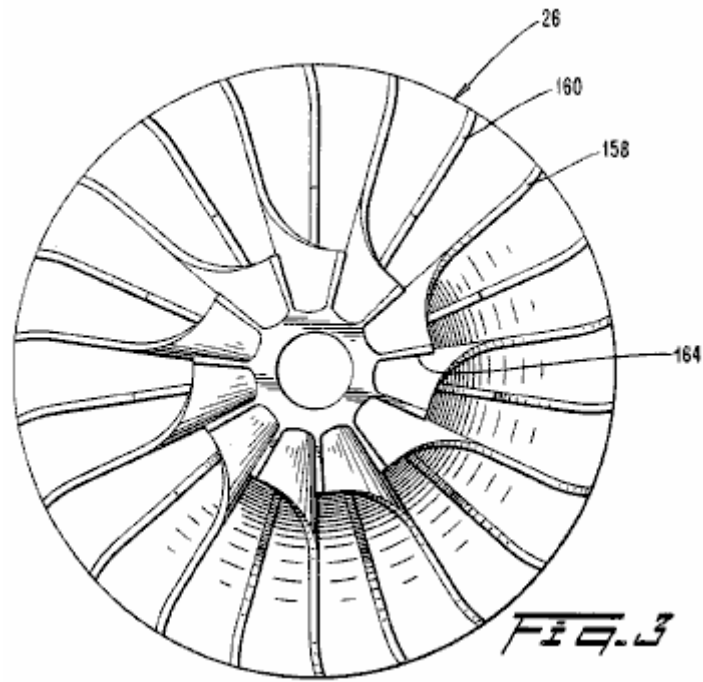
is a frontal view of the impeller of the supercharger of Fig.1;
